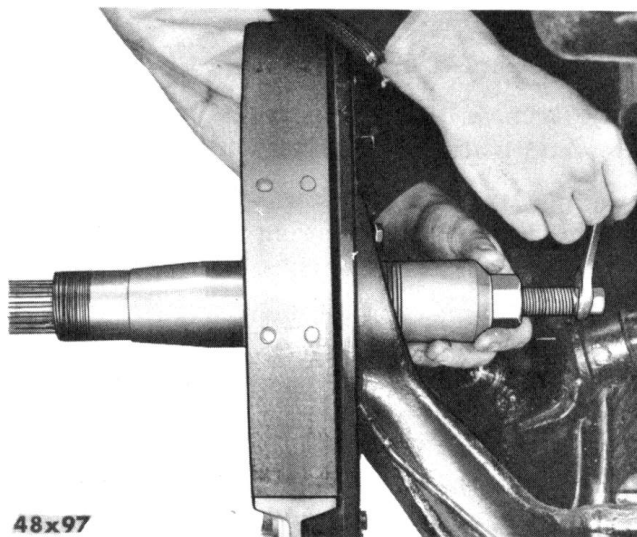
Removing Rear Wheel Drive Shaft Large Seal
